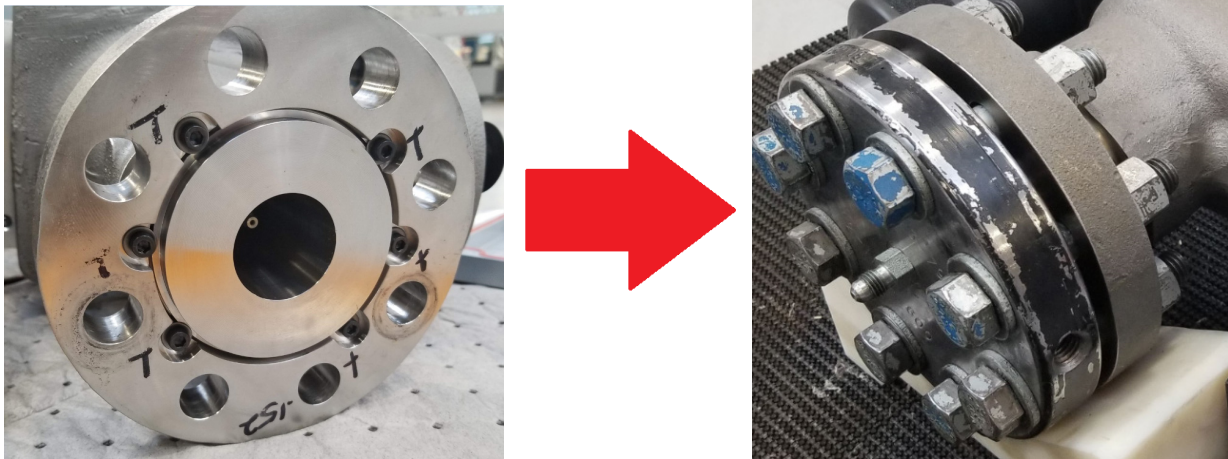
Illustration of Raised Face Style Diverging Sleeve
